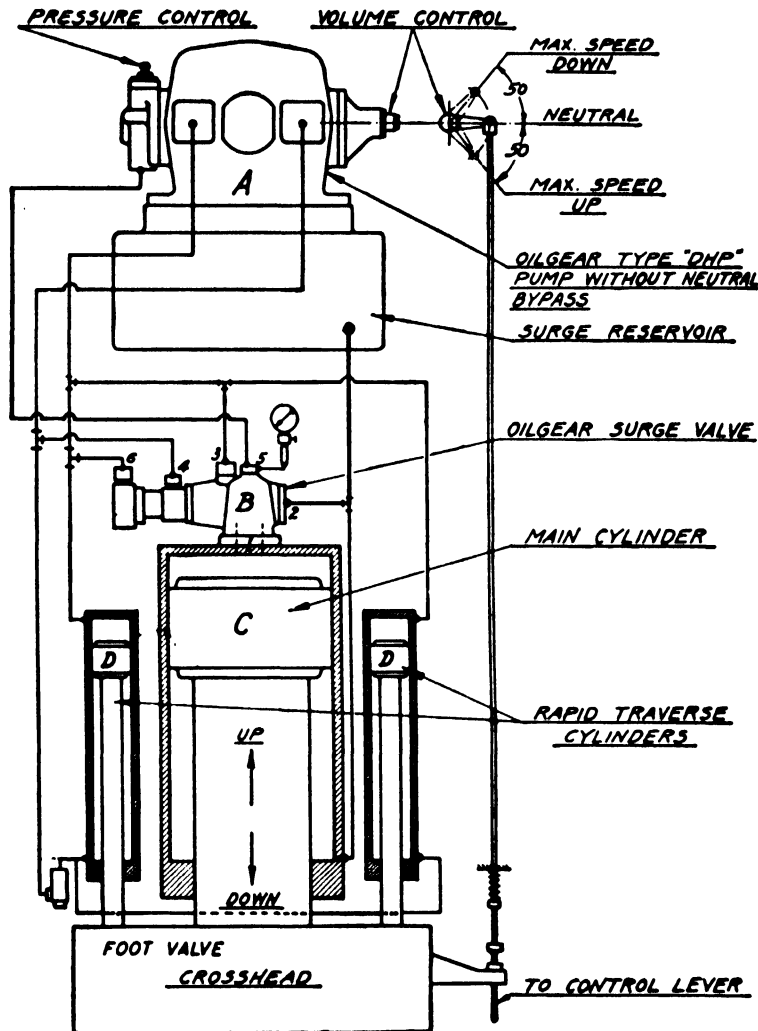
High-speed-press oil circuit. (The Oilgear Co., Milwaukee, Wis.)
